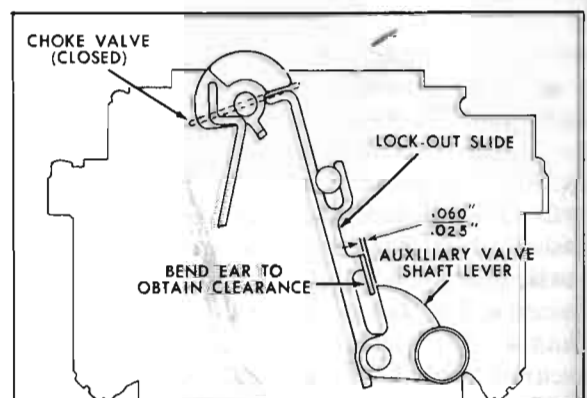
Lock-Out Slide Clearance With Choke Valve Closed
